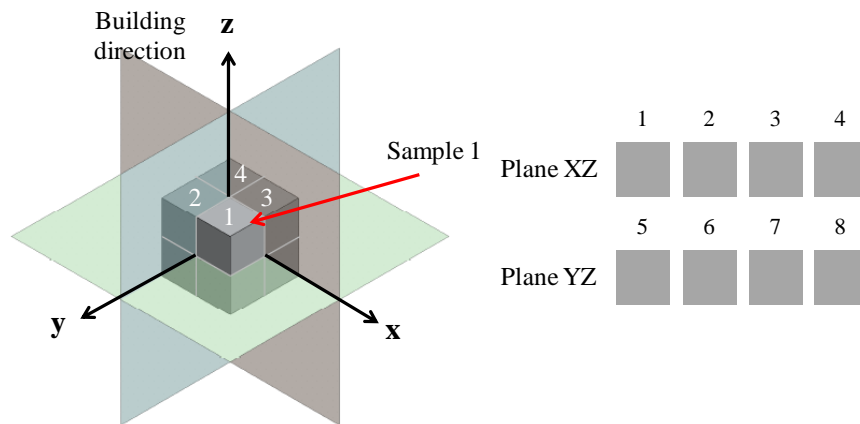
Cutting plane showing how the SLM AlSi10Mg samples were cut.
